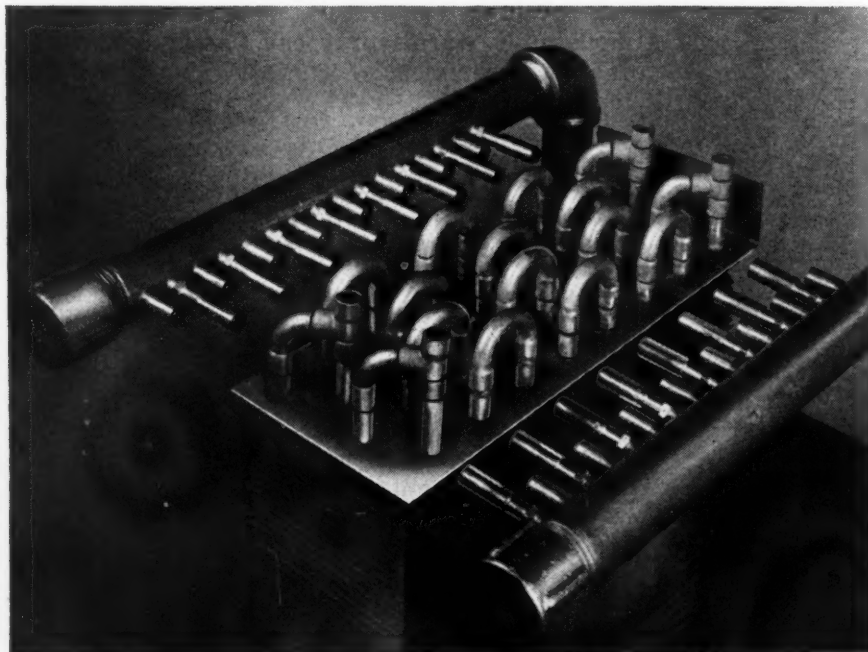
Close-up View of Equipment, Showing Burners and Joints to be Silver-soldered. Thirty-two Joints are Soldered in Forty Seconds
